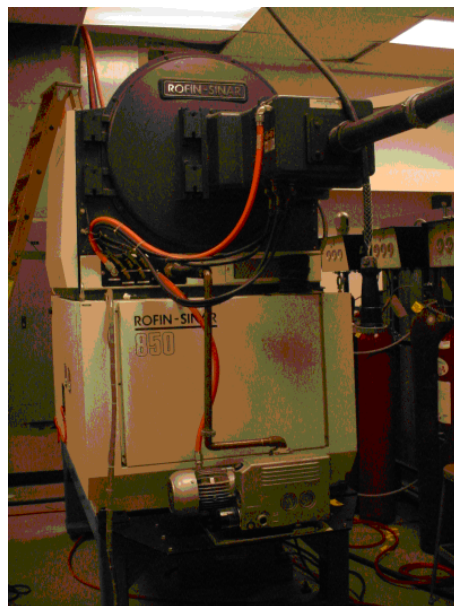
Rofin Sinar 850 CO₂ Laser was Used for Single- and Dual-Beam LBW/GMAW-P Hybrid Welding
